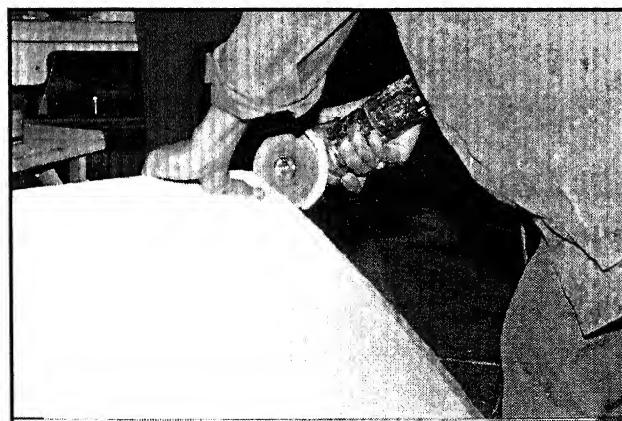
Grinding done on bonnet pattern for finishing the edges of exterior FRP skin.
